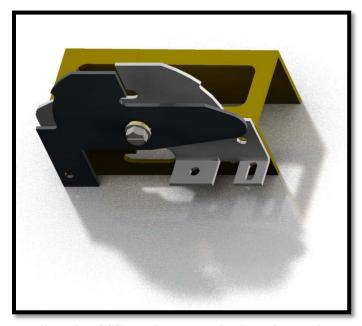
EOSS Jaw Assembly with Aneroid Housing
